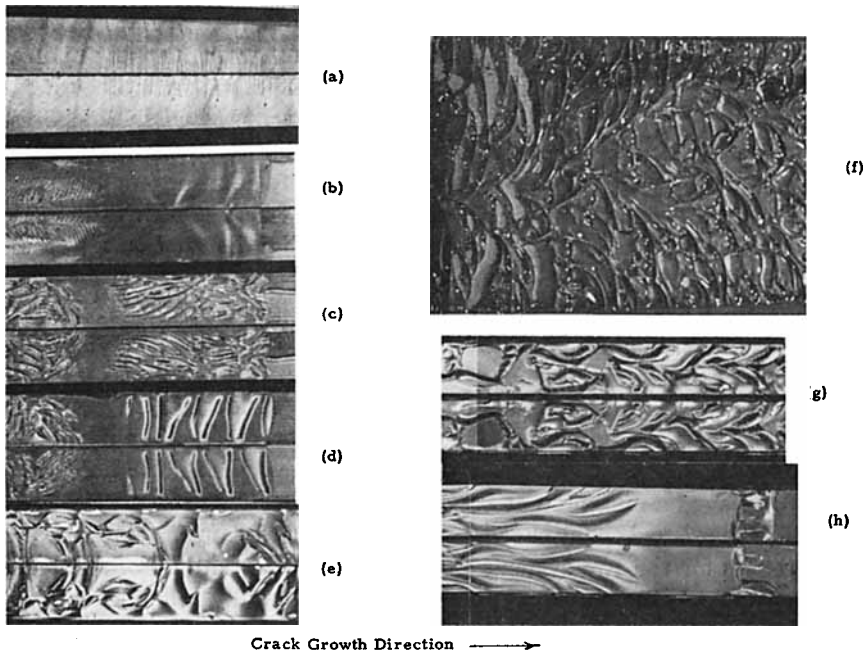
Fracture morphology of 10T/180 adhesive joints from 10 to 50 mils thickness: (a) 5 mil; (b) 10 mil; (c) and (d) 25 mil; (e), (f), (g), and (h) 50 mil. Specimen (f), 3 in. thick; all others $\frac{1}{2}$ in. thick. Specimens (a) through (e), $m = 90 \text{ in.}^{-1}$; specimen (f), uniform beam, $h = 1 \text{ in.}$; specimen (g) and (h), $m = 4 \text{ in.}^{-1}$. Specimen (h), cross-head rate 10 in./min (high rate fracturing); all others at 1 in./min or equivalent. Note: Photo (a) taken using specular reflection to reveal microripple pattern.
